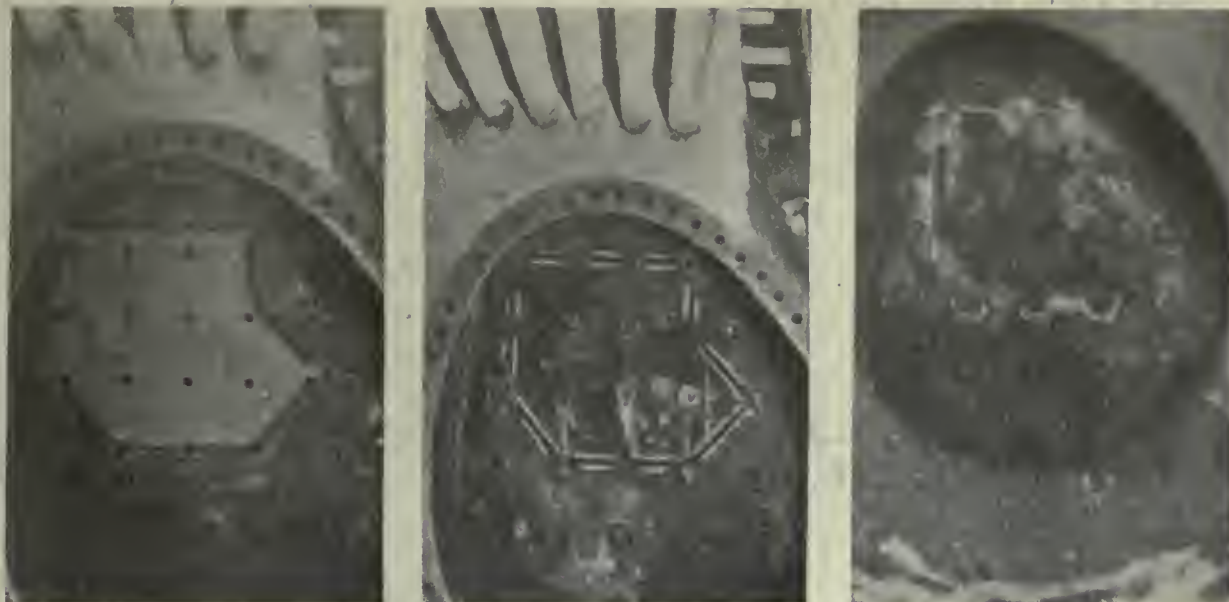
MARINE BOILER COMBUSTION CHAMBER BACK
